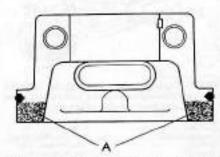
When installing front main bearing cap on three cylinder engine, coat area of front of seal ring (indicated by shaded area "A") with a light film of gasket sealer.
